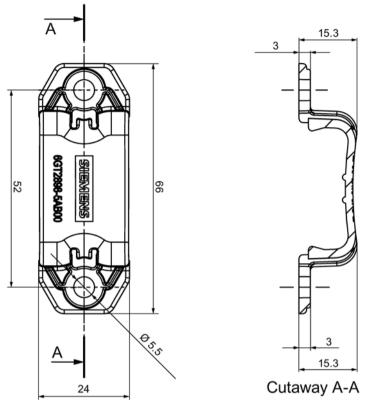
Dimension drawing (6GT2898-5AB00) for SIMATIC RF645T
